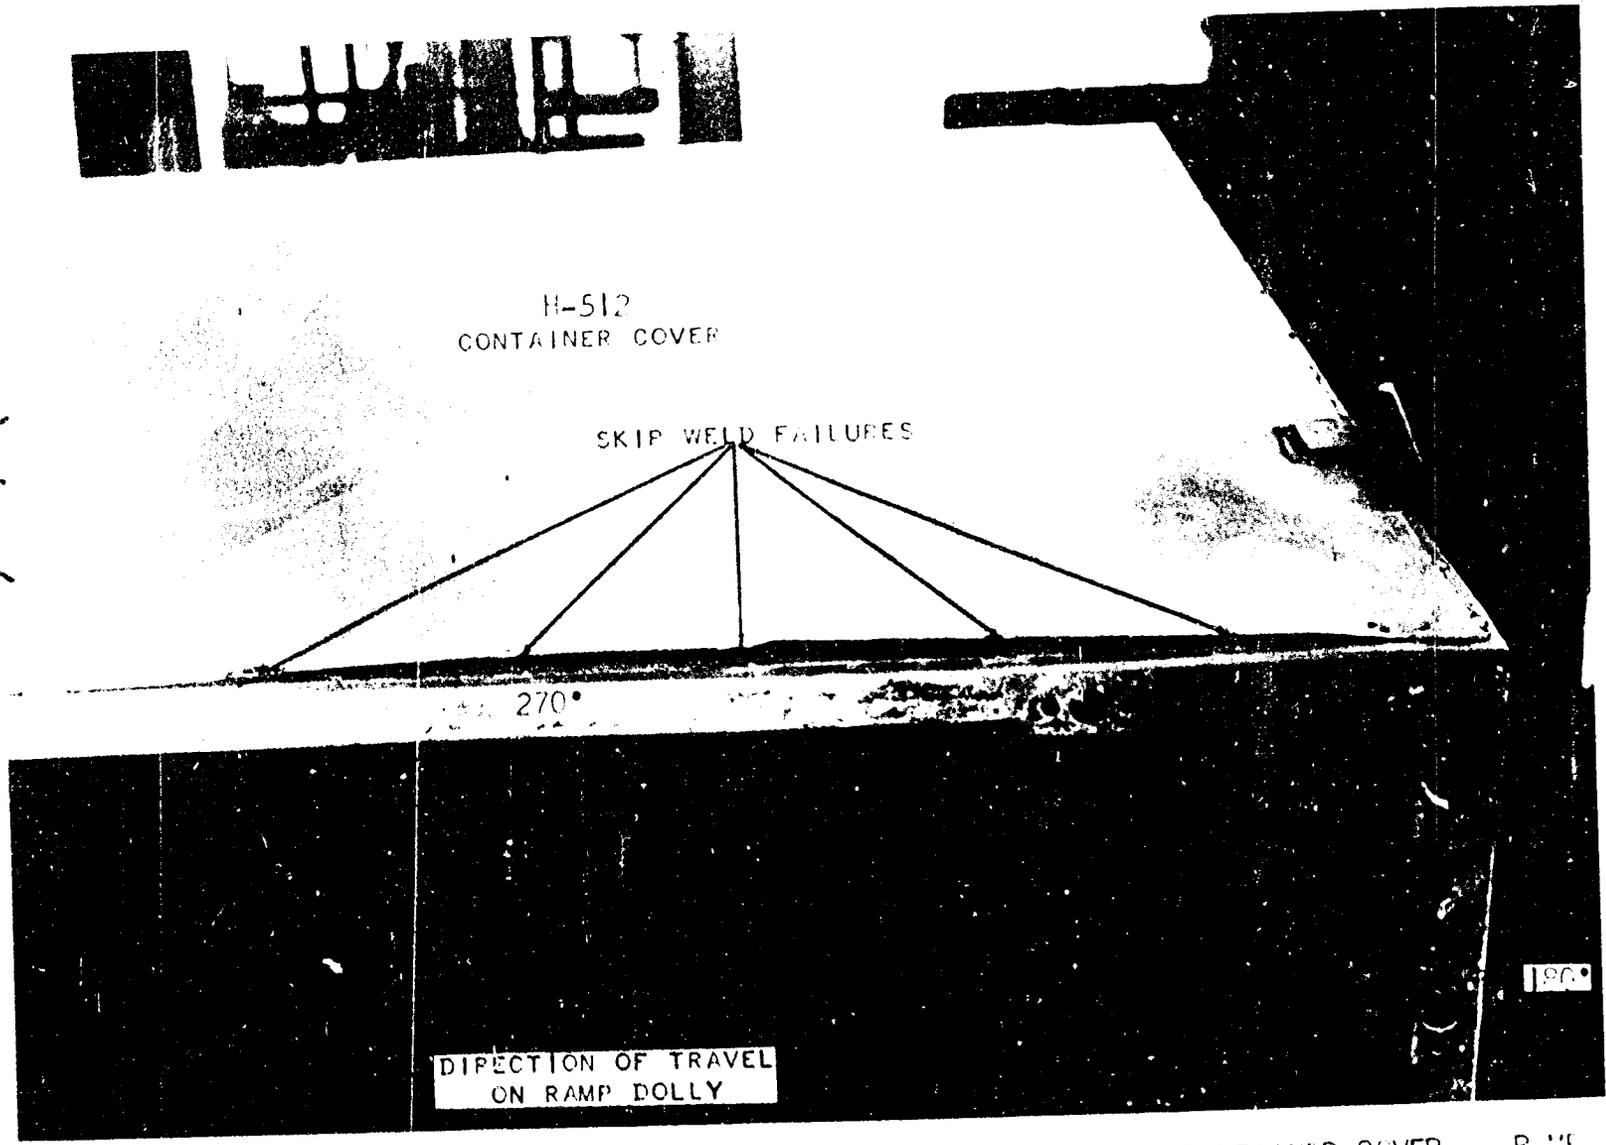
SKIP WELD FAILURES ALONG THE BOTTOM EDGE OF THE H-512 CONTAINER COVER -- RAMP AND DOLLY TESTS OF THE H-512 CONTAINER.
